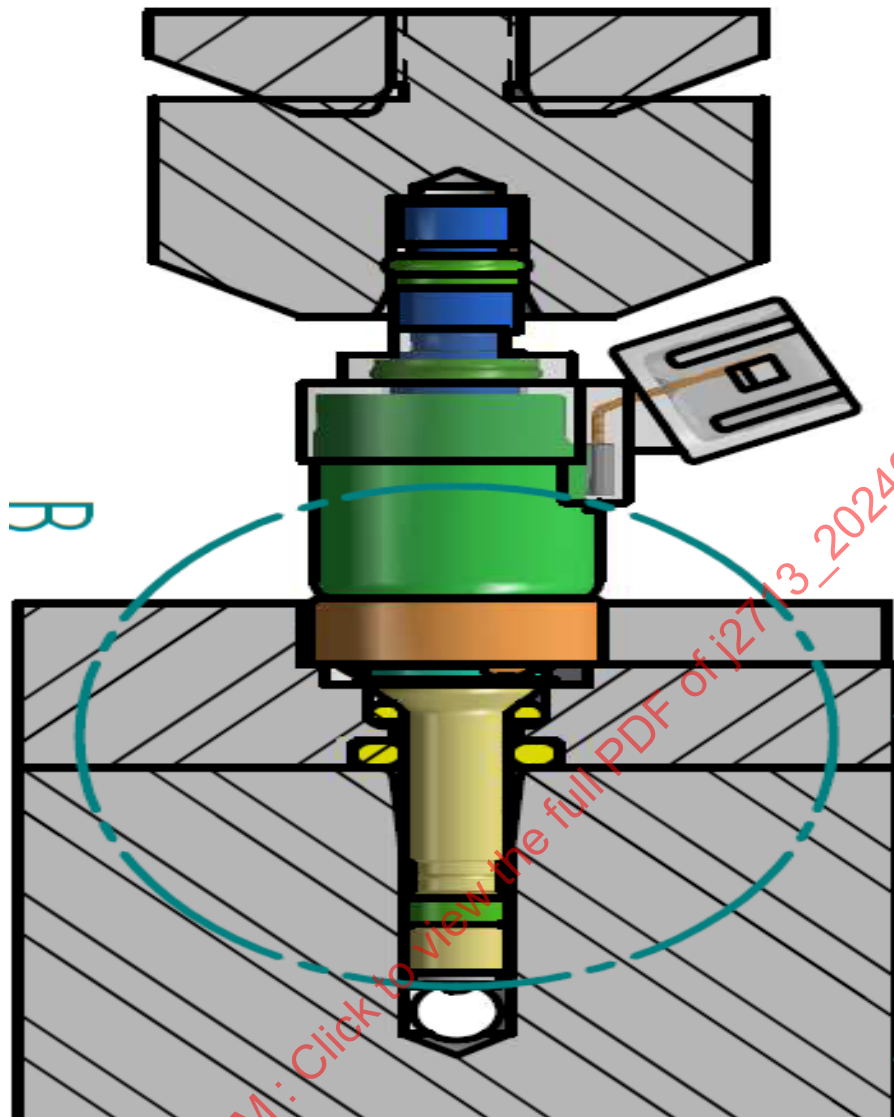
Injector nest fixture for GDI FID tip leakage measurement
